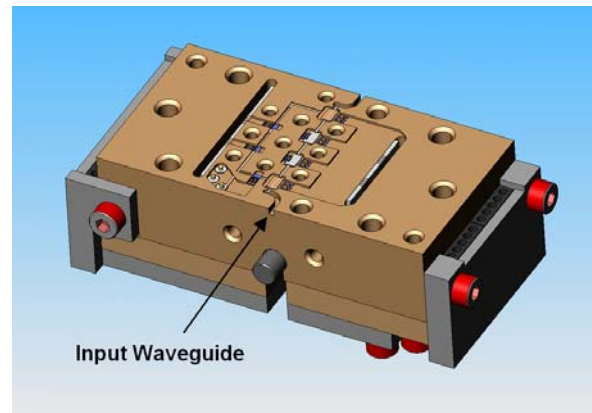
3D drawing of T/R Module with lid removed, showing input and output waveguides and chip channels.
